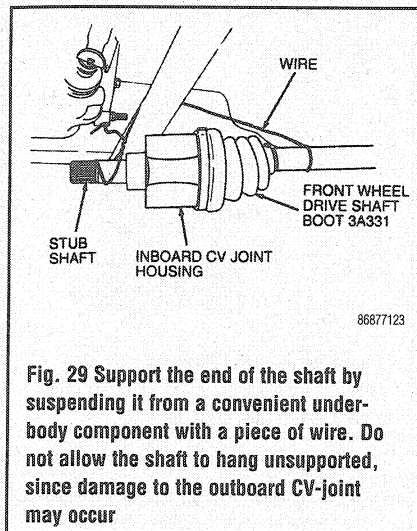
Support the end of the shaft by suspending it from a convenient underbody component with a piece of wire. Do not allow the shaft to hang unsupported, since damage to the outboard CV-joint may occur
